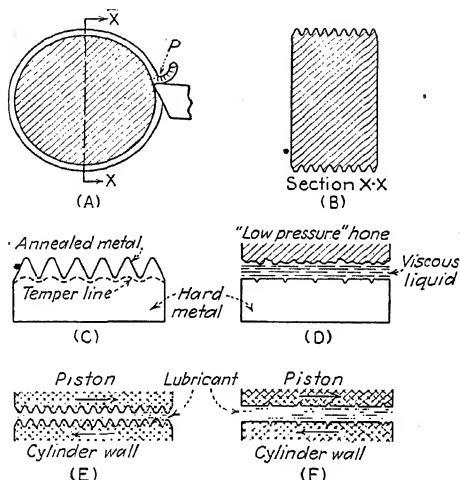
Types of bearing finishes: (A) tearing action of a cutting tool; (B) rough surface from conventional cutting or grinding; (C) effect of tearing action; (D) principle of the "superfinish" process; (E) conventional bearing; (F) "super-finished" bearing. [Sections (C) (D) (E) and (F) greatly enlarged.]
